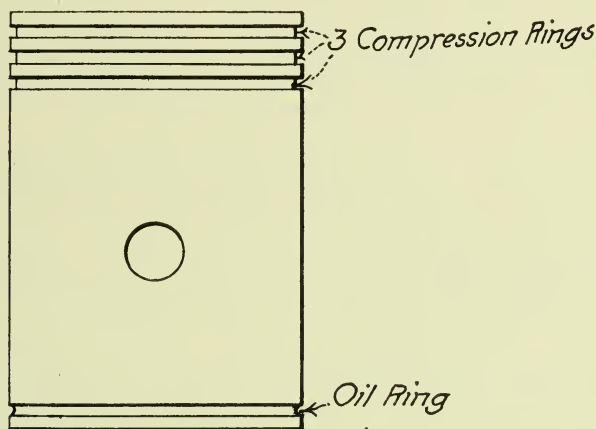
PISTON EQUIPPED WITH THREE COMPRESSION RINGS AND AN OIL RING
